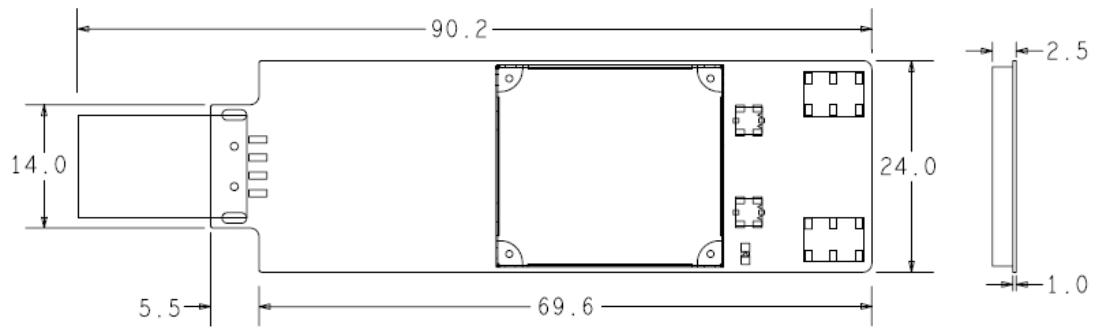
PCB and Shield Mechanical Drawing (dimensions in millimeters)
